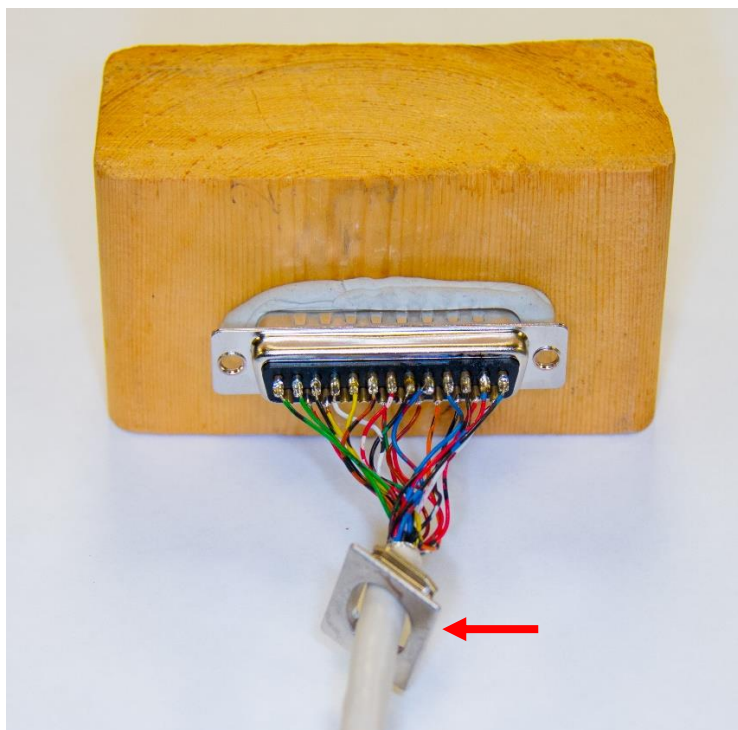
Wires soldered to DB25 connector with threaded cable slot entry tab (red arrow).
